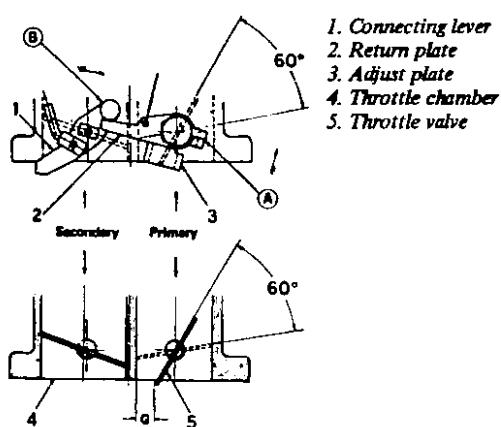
Adjusting the throttle valve interlock opening - DAK340 carburettor
